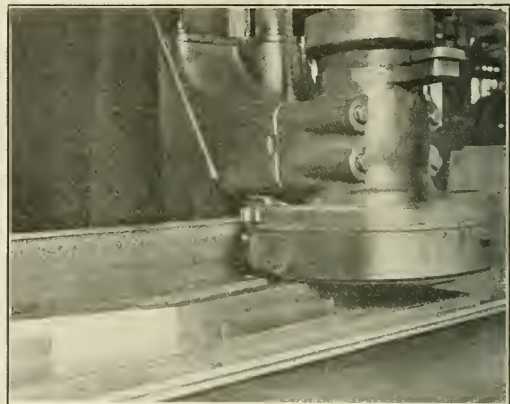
Surface Grinder, Equipped with Magnetic Chuck Finishing a Link.
